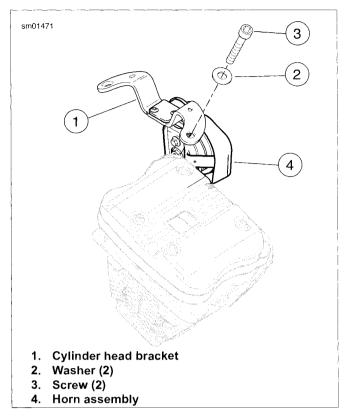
Horn and Cylinder Head Bracket (side mounted horn)
